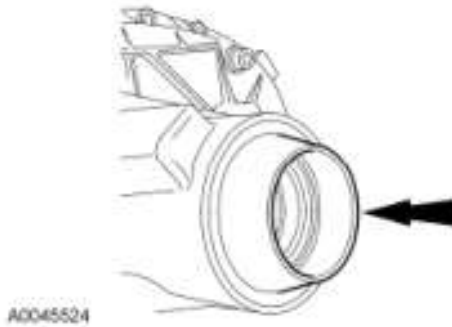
Locating Transfer Case Rear Output Shaft Seal
